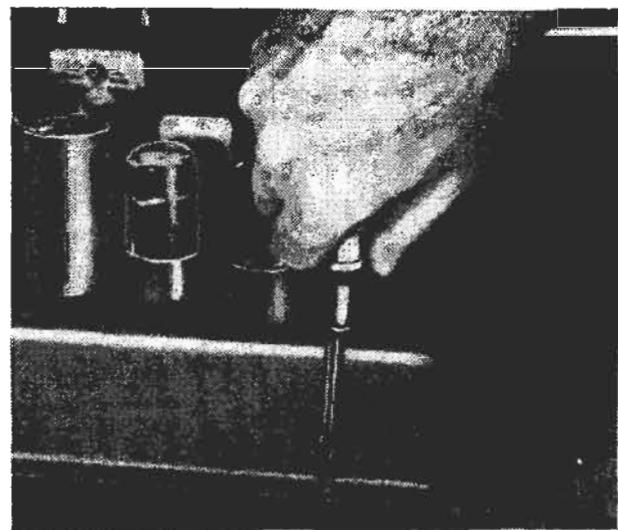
Using a medium-sized screwdriver to remove the chassis hold-down screws at the back of our superheterodyne receiver.
